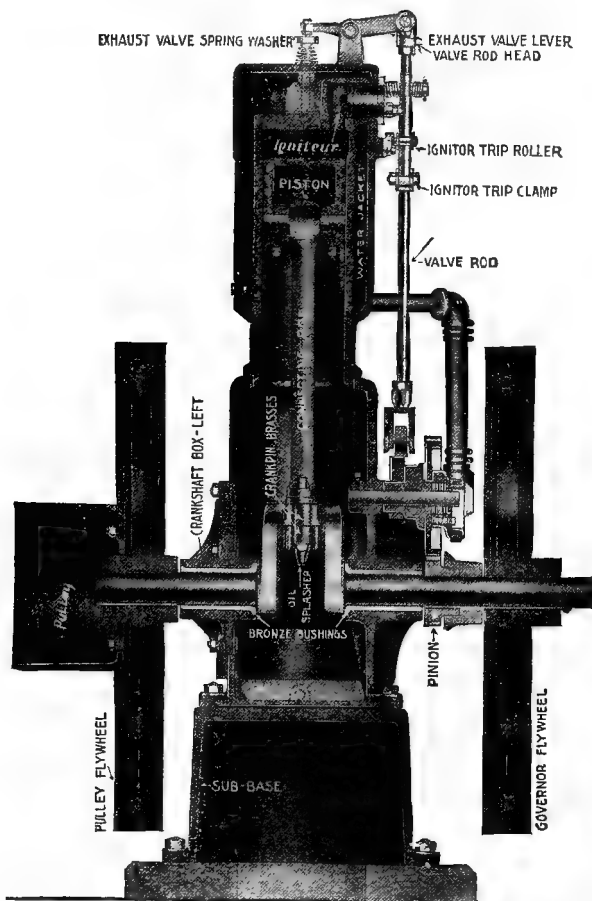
Sectional View of Vertical Engine, Showing Important Components.
